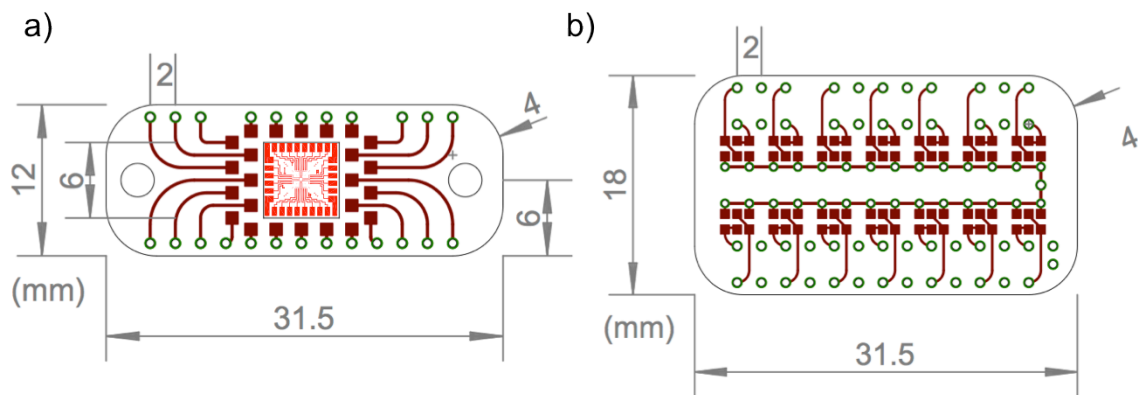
Engineering schematic of sample holder (a) and probe tip (b) used for low temperature measurements.
